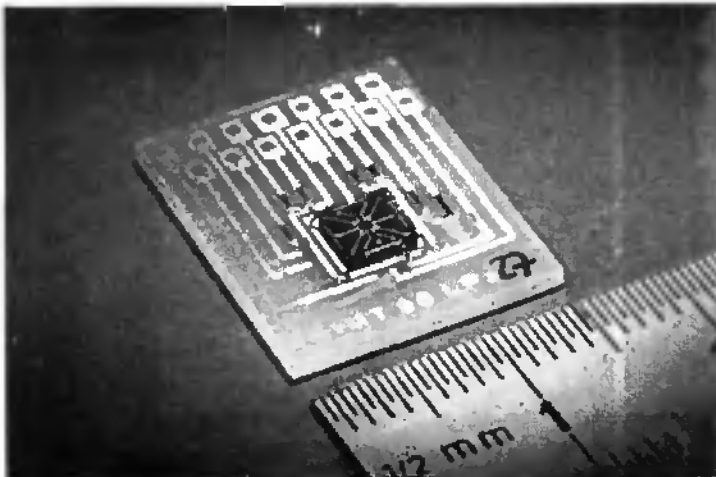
Motor chip (4 mm x 4 mm) mounted on a PCB and bonded, ready for the electrical actuation tests. Because of its small diameter of 540 μm , the rotor, located in the center of the chip, is not visible.
